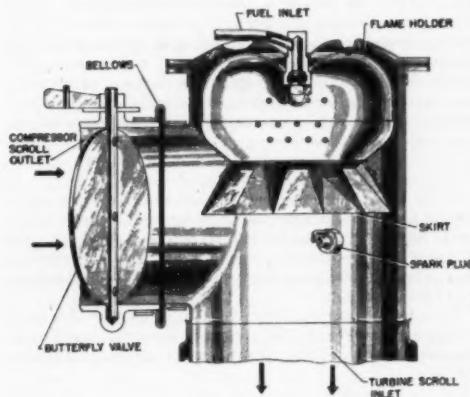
ELBOW-TYPE COMBUSTION CHAMBER OF T-45 PUMP
